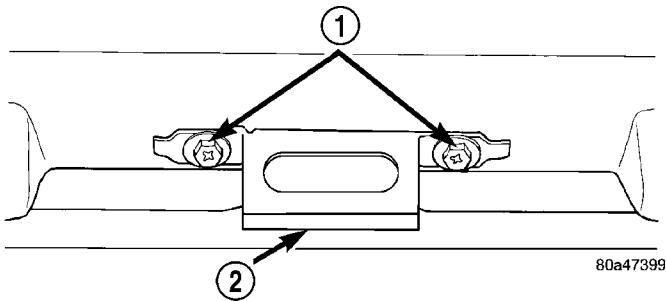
GLOVE BOX LATCH STRIKER REMOVE/INSTALL
